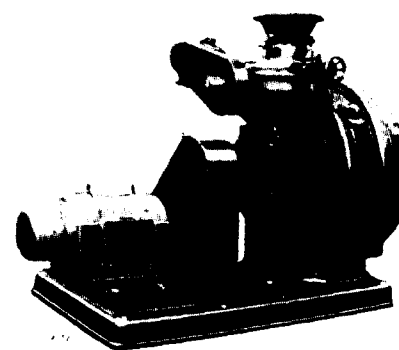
Herbert Type C all-electric two-spindle drilling machine.
